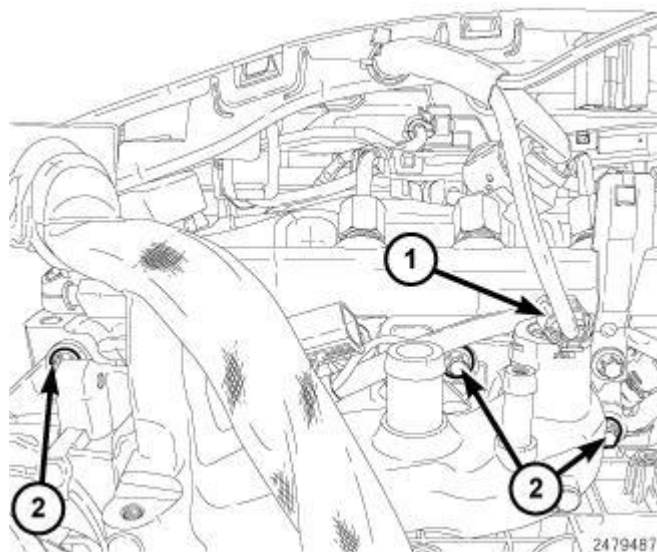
Lock Tabs & Engine Wire Harness
